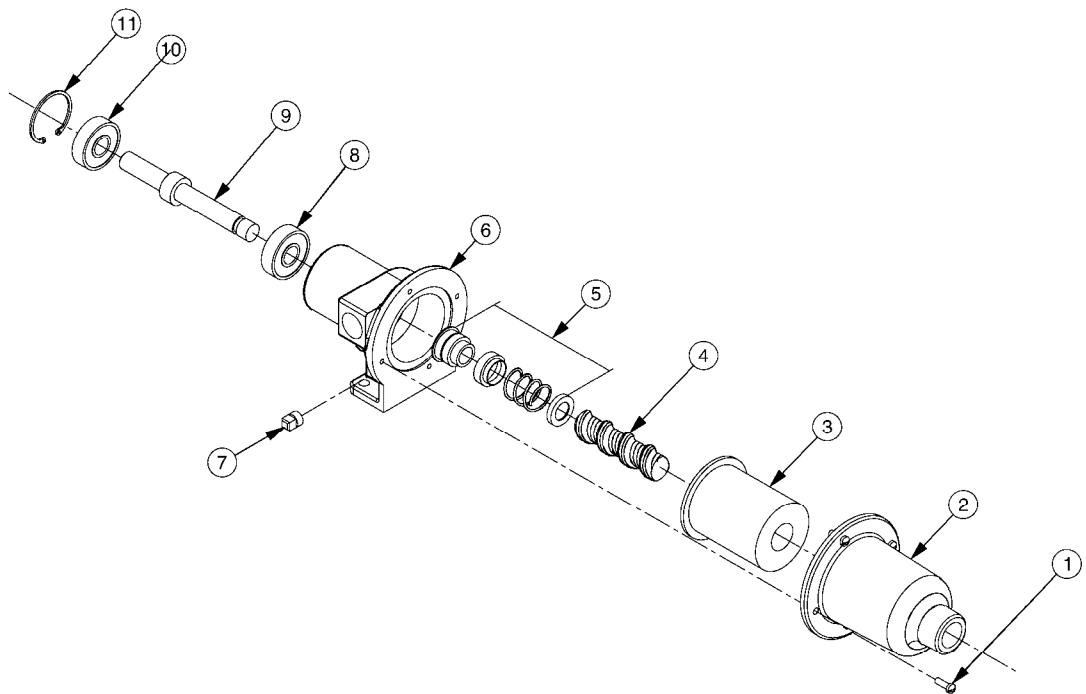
Exploded view of the Progressive Cavity Pump.
